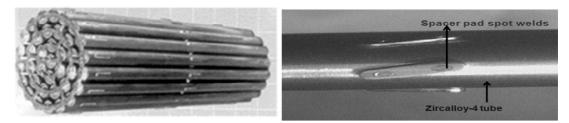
Bundle of fuel tubes and single spacer pad welded fuel tube used in the PHWR.
